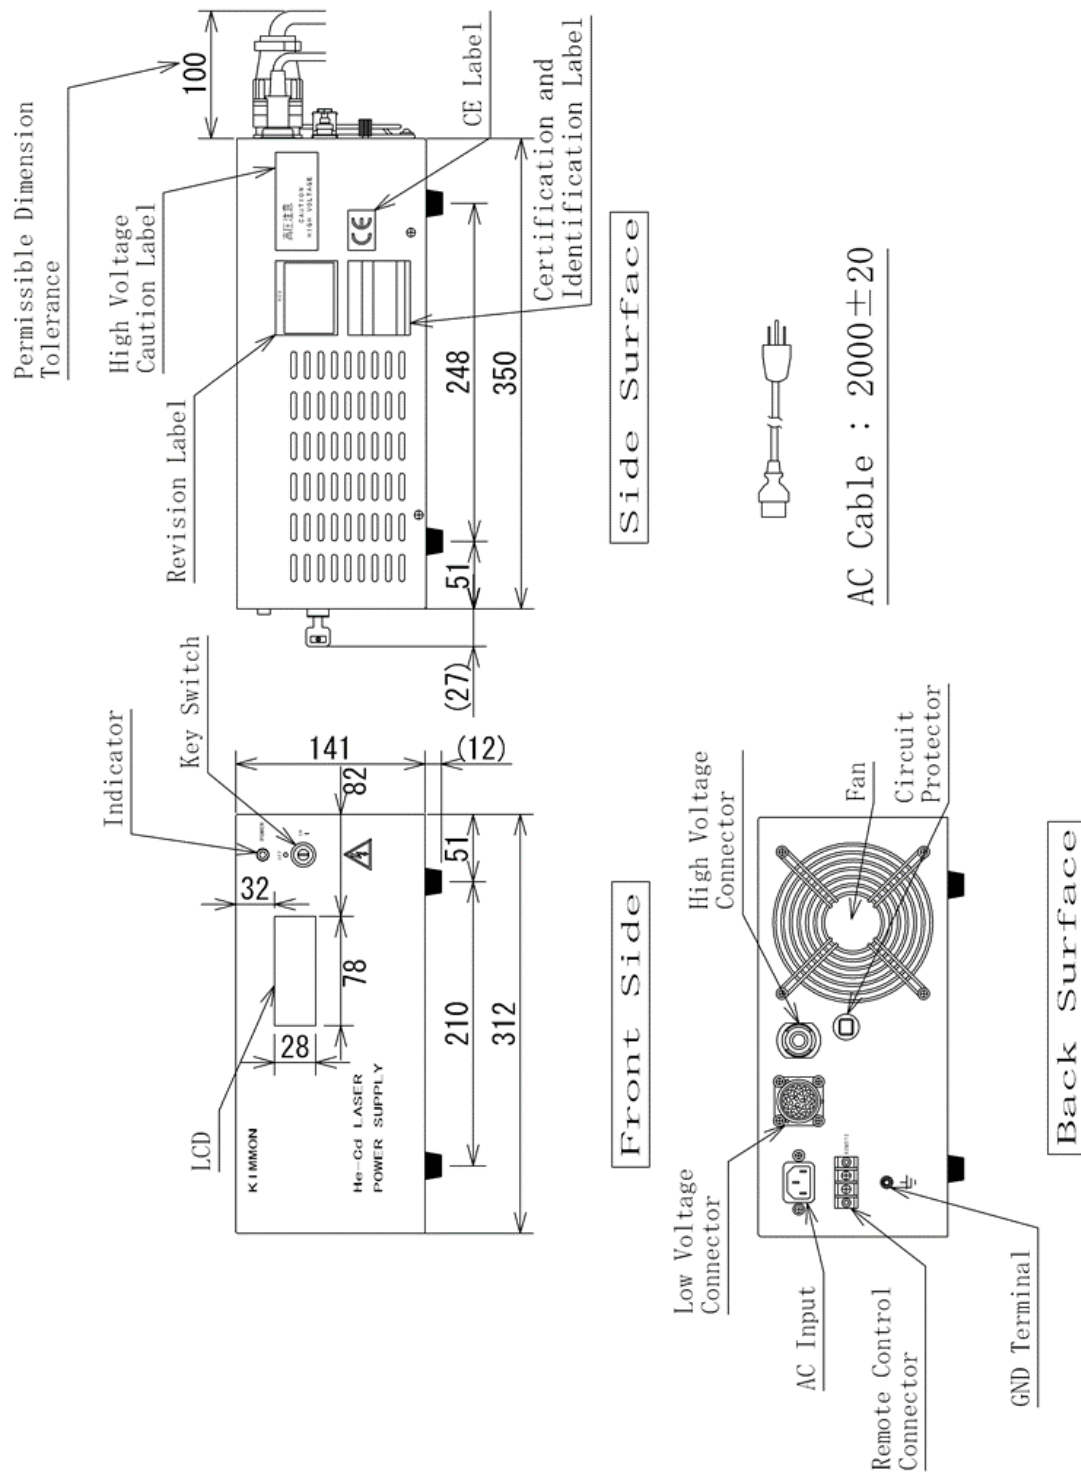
Laser Power Supply Dimensions(Units: mm)
